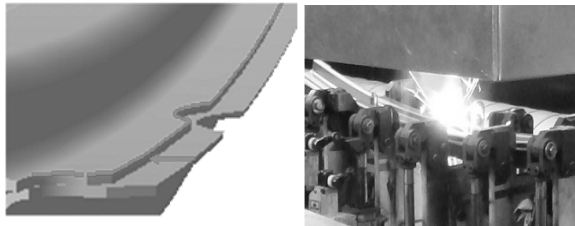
The application of laser welding for the production of lightweight bumper
